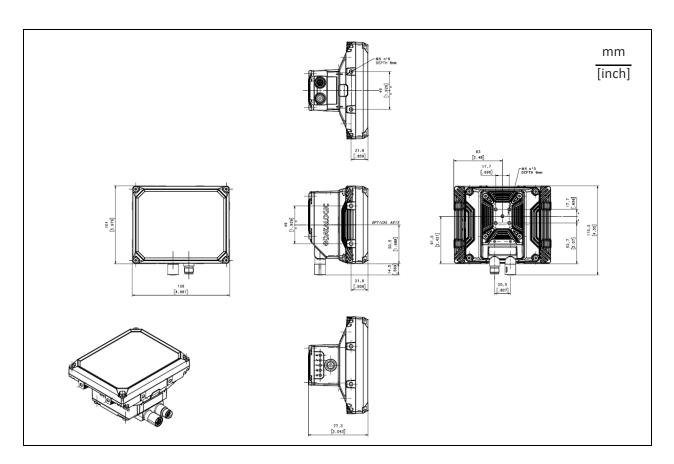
Overall Dimensions: Matrix 320 with 36 LEDs illuminator (connectors 0°)
